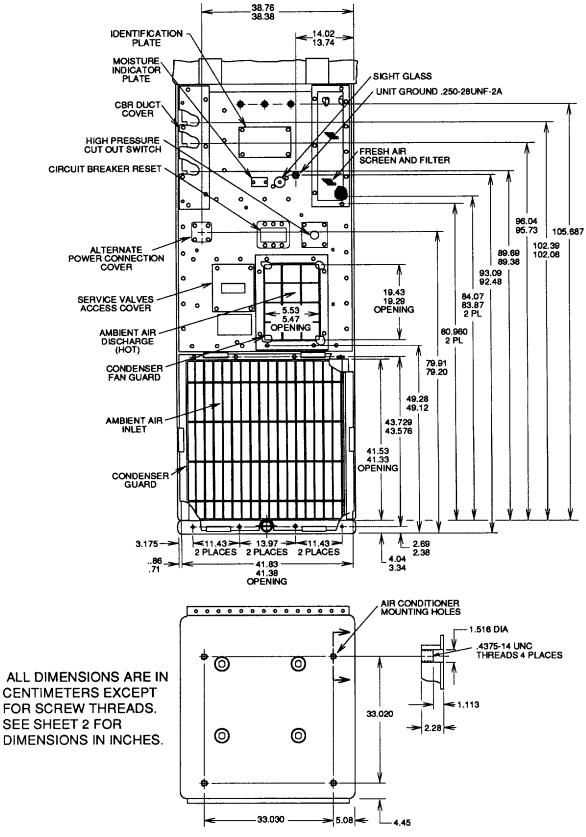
Installation Dimensions (Sheet 5 of 6)
